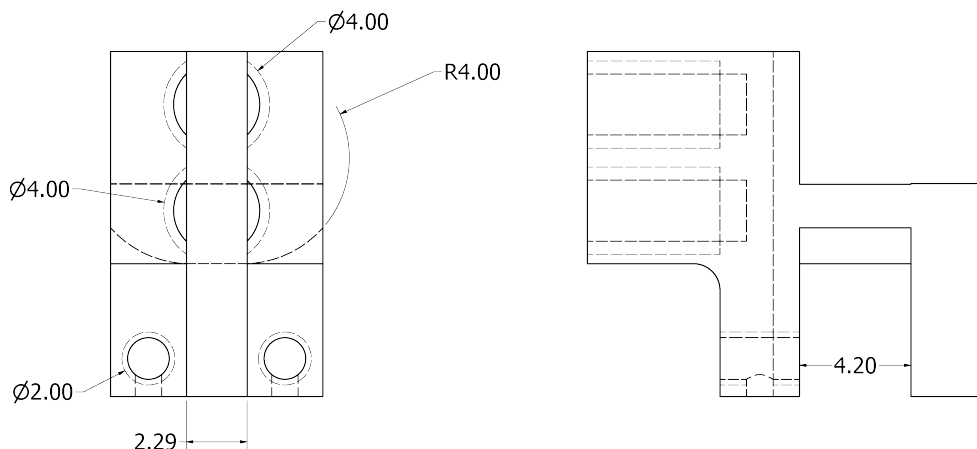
Microwave holder dimensions, showing the saddle-like design with a radius of 4 mm (fits onto the AQT trap base) and the vented holes for securing. Also, the groove for the 26AWG wire is shown, with the two M4 threaded holes to place setscrews and lock the wire into place.
